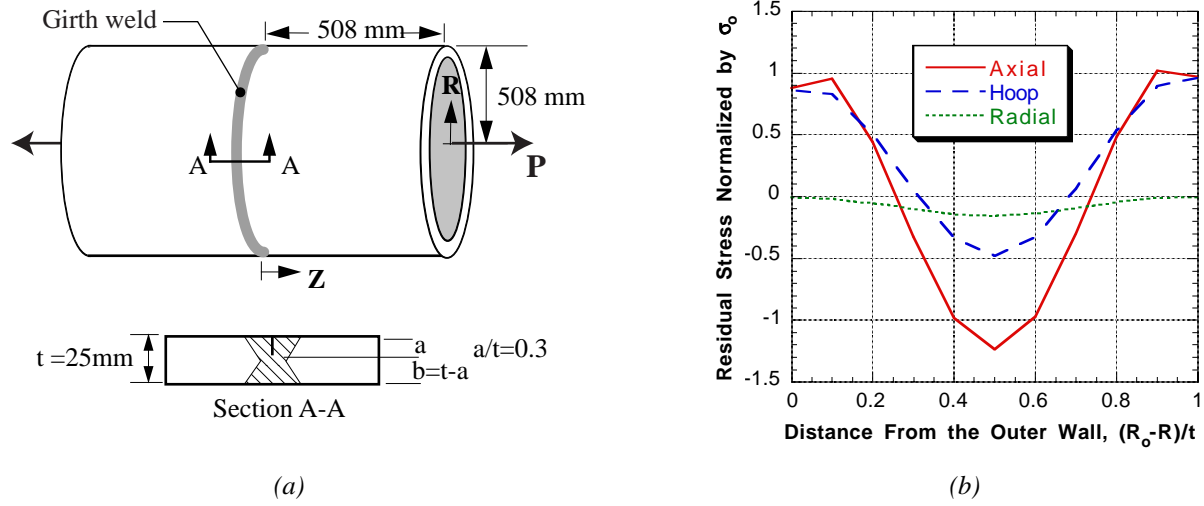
(a) Girth-welded pressure shell, (b) RS in the unflawed condition
